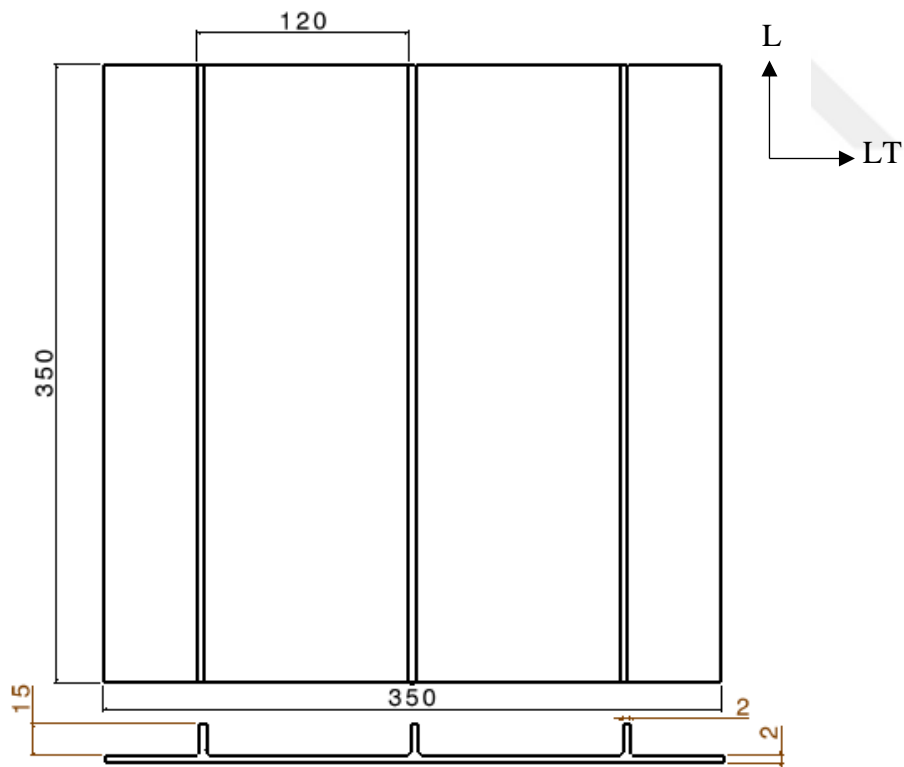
Technical Drawing of an Integrally Stiffened Panel
